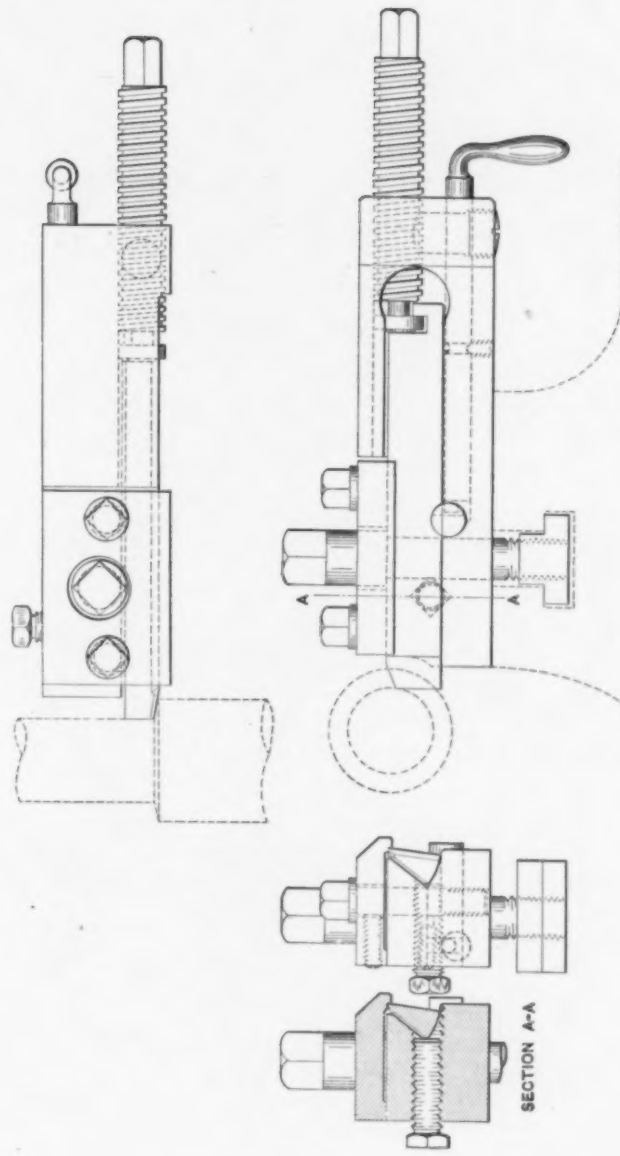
FORM OF TURNING TOOL AND HOLDER FOR ENGINE LATHE
